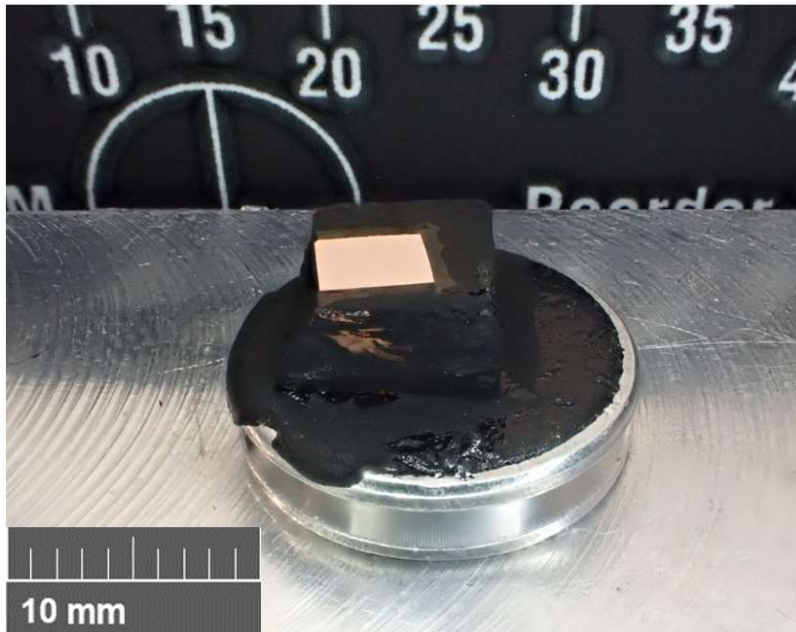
Example of specimen on 12.7 mm SEM stub post ion mill – (Cold spray transverse direction sample shown).
